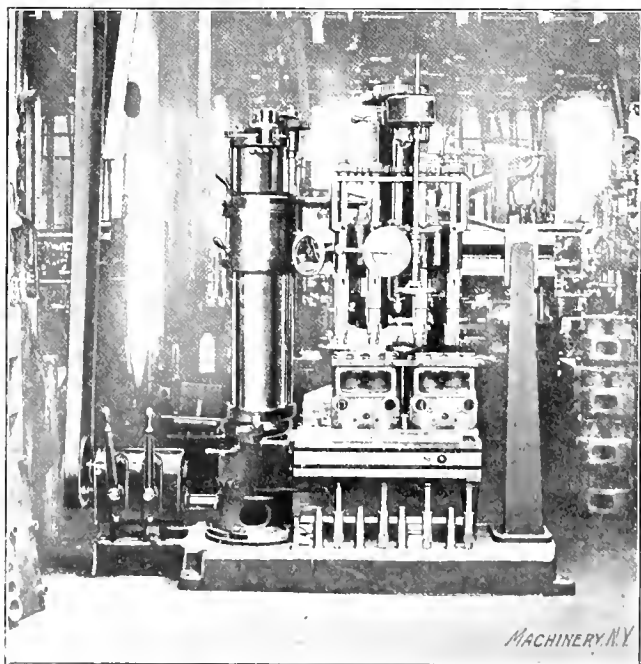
"American" Radial Drill in Winton Factory, with Four-spindle Attachment for Reaming Automobile Cylinders
